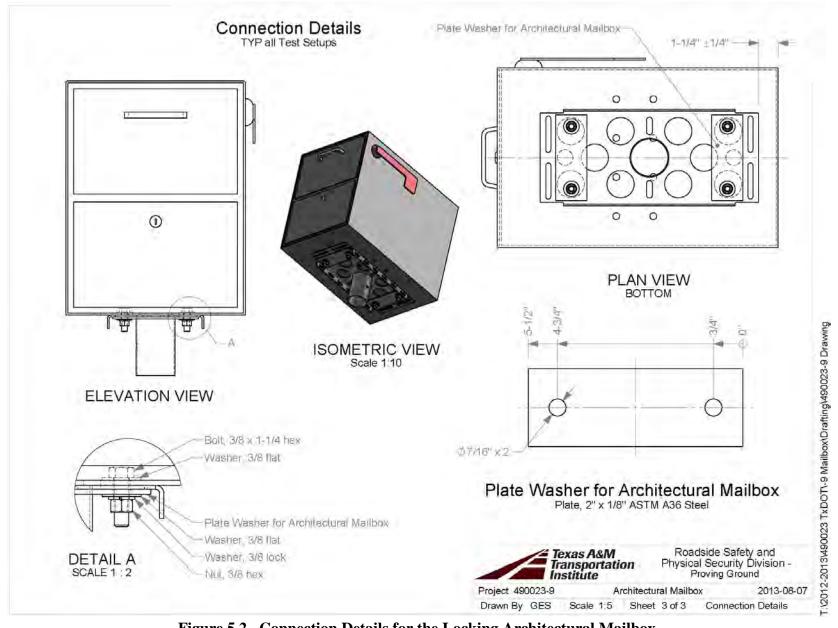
Connection Details for the Locking Architectural Mailbox.
